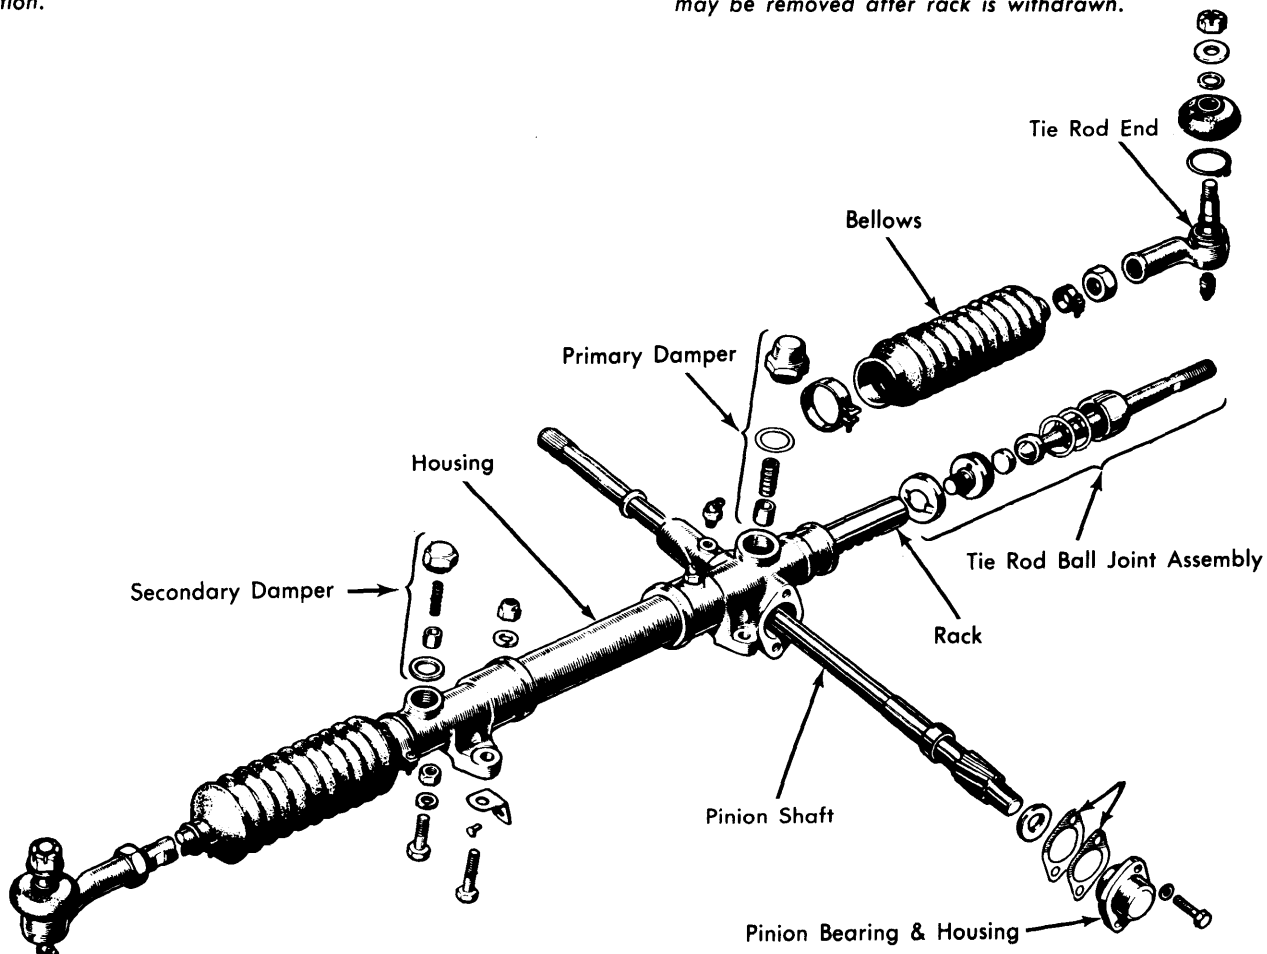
MG Midget Rack and Pinion Assembly with Detail of Components
